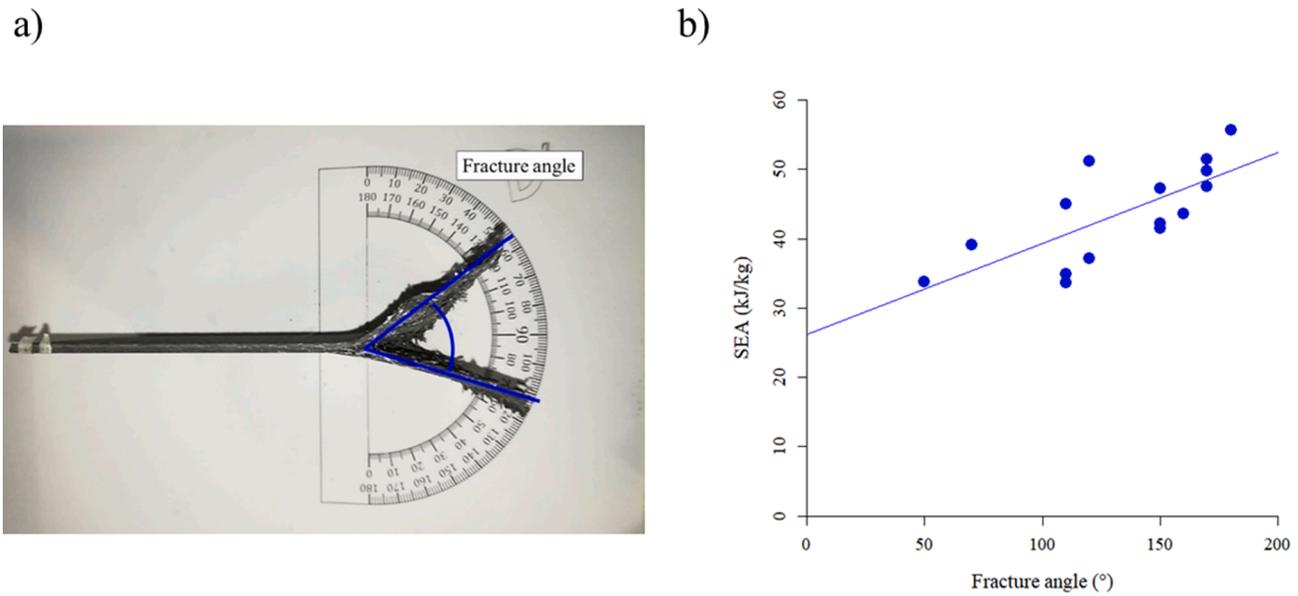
a) Measurement of the fracture angle of a crashed specimen. b) SEA as a function of the fracture angle.
